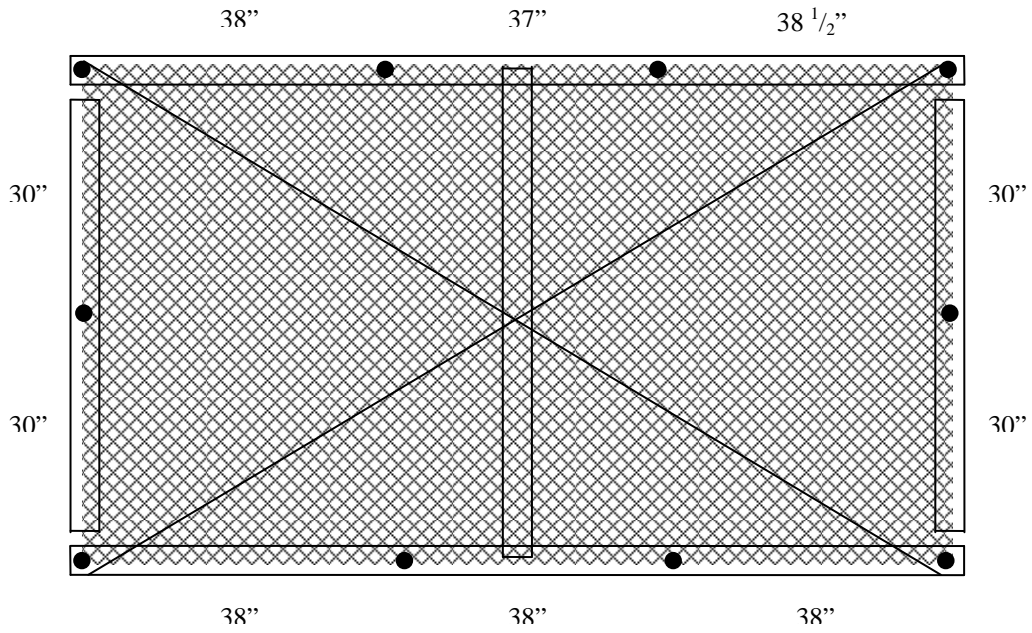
Weld Spacing for Series 1 Tests on Frame 1
